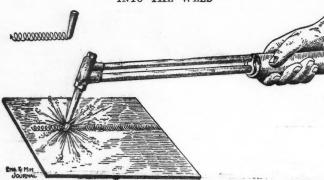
CIRCULAR MOVEMENT OF WELDING TORCH
